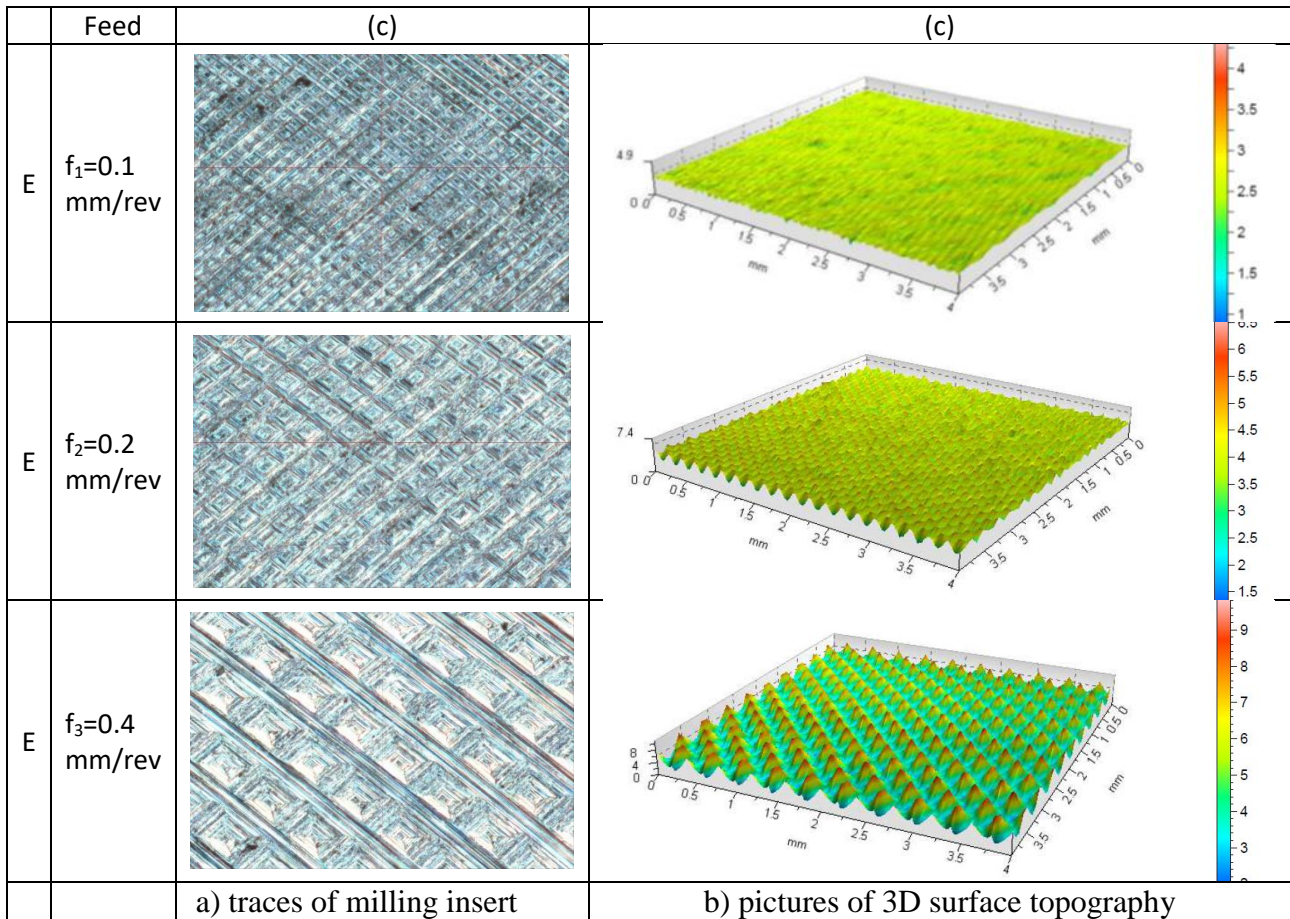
Traces of milling insert on the specimen's surface and 3D surface topography in the middle of specimen (c) when the insert leaves the plane (E) as a function of feed rate, ($v_{c1}=250$ m/min)
